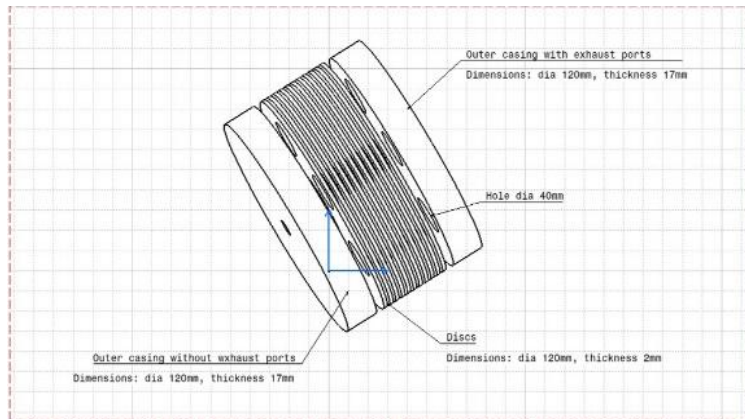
CATIA 2-D Draft assembly of disc, washer, shaft, ball bearing, and outer casing
